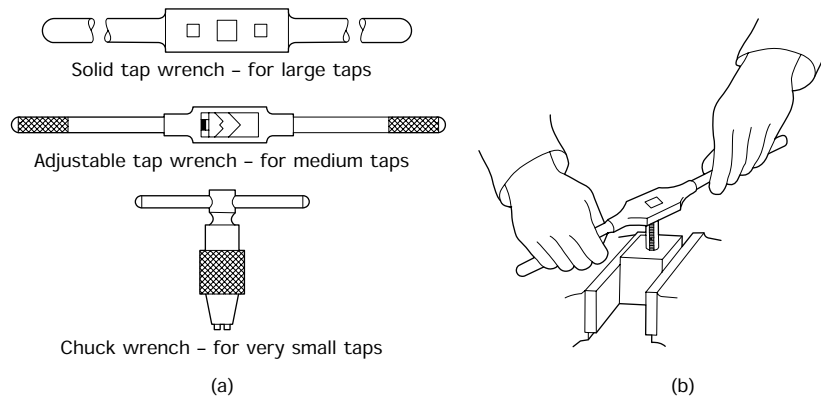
Tap wrenches: (a) types of tap wrench; (b) use of tap wrench
